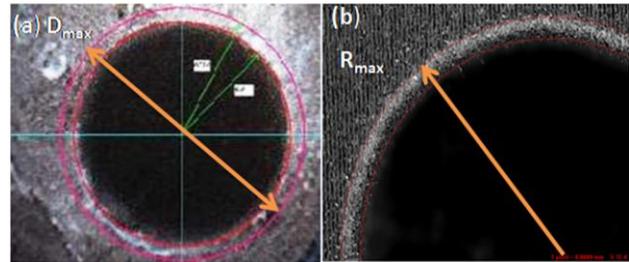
Measurement of maximum damage drilled hole diameter (D_{max}): (a) Peel up at the entry hole and (b) Push out at the exit hole [8].
